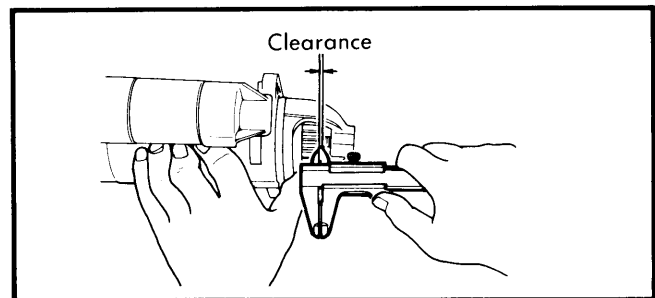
Measuring Pinion Edge-to-Pinion Stopper Clearance
